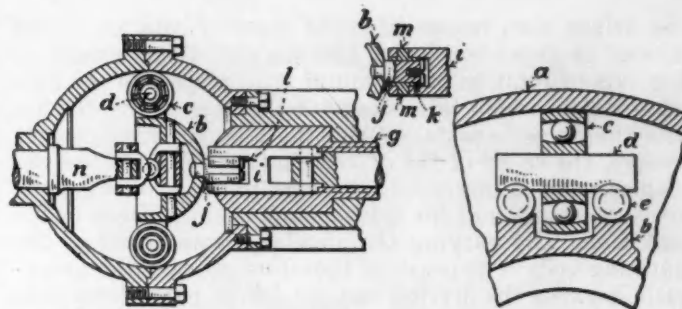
VIEW SHOWING DETAILS OF MOTOR CONSTRUCTION
